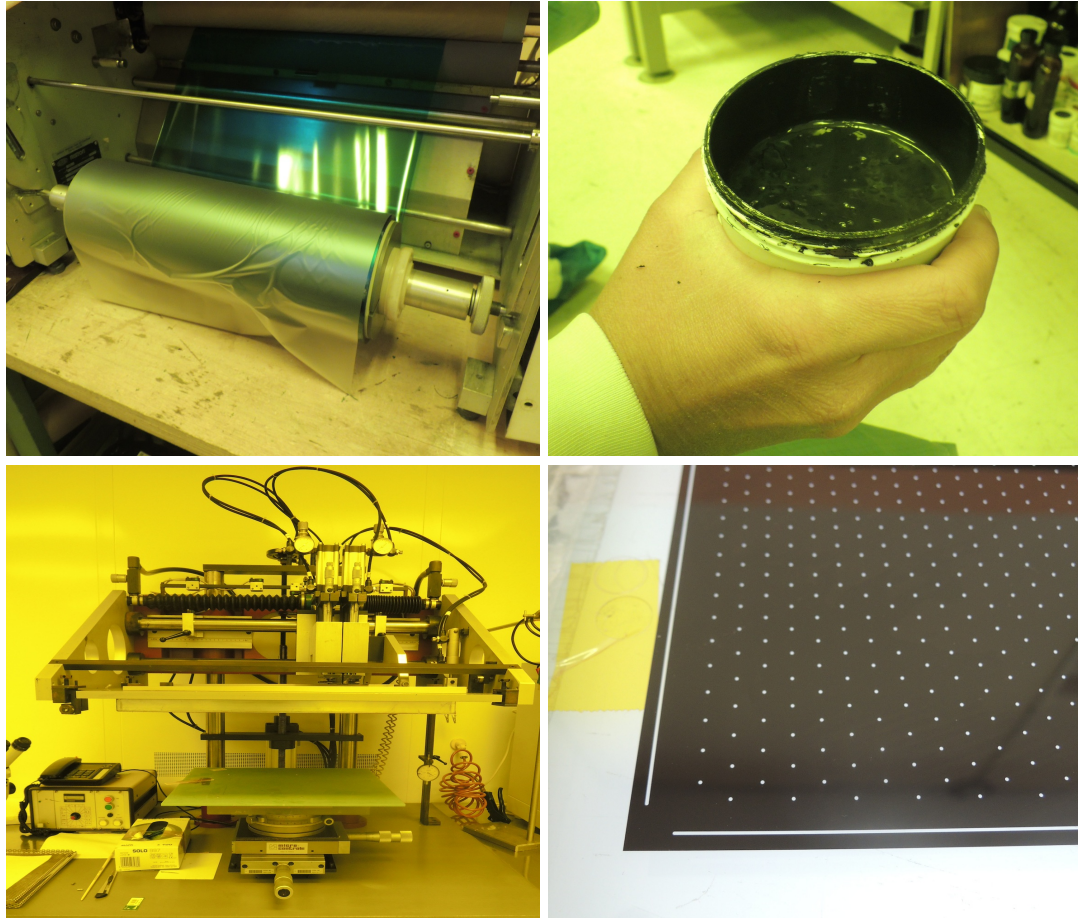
Top left: A roll of photoimaging coverlay mounted on a dispenser. Top right: Paste used for making the resistive strips. Bottom left: A machine used for screen printing of smaller chambers. Bottom right: A mask used for making pillars. UV light will pass through the holes in the mask and harden the exposed coverlay.
